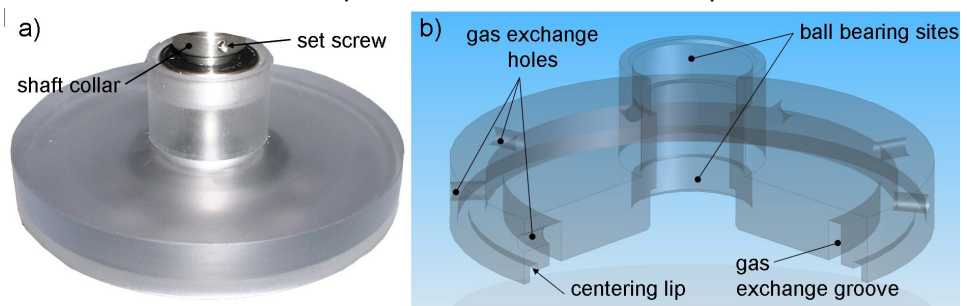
Flange design: a) picture of the prototype (no gas exchange capability); and b) clipped CAD rendering of the newly designed flange (with gas exchange capability).
